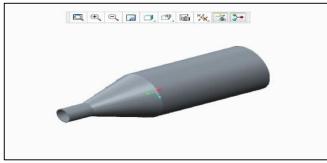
CAD model of Muffler B. Design of Perforated Tubes
